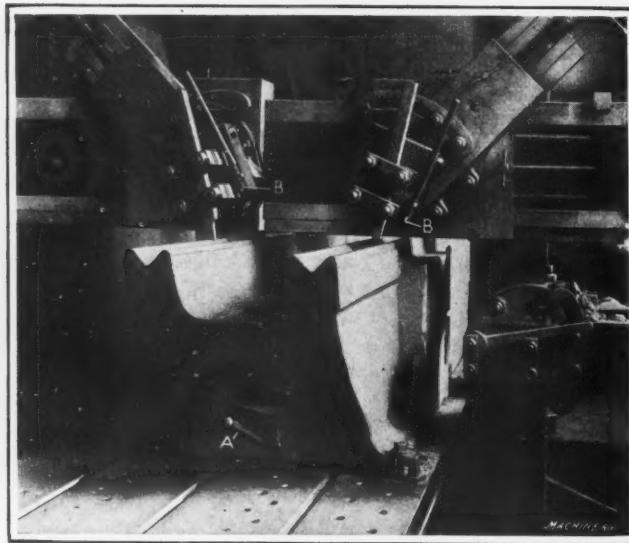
Close-up View of the Tools used for simultaneously finish-planing Two Sides of the V-bearings in a Planer Bed
